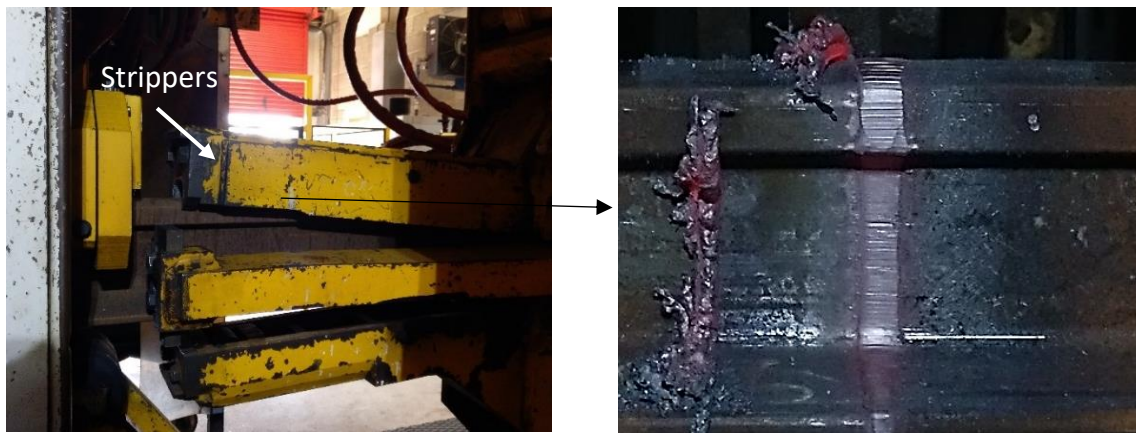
Stripping process. Excess of material is removed from the Flash Butt Welds.
